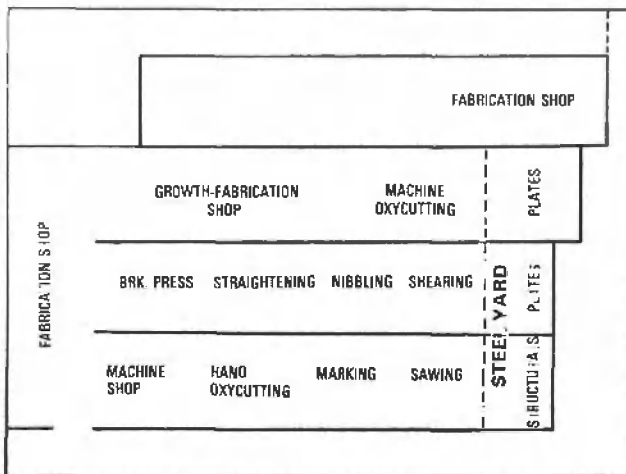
Schematic layout of Cutting & Fabrication Shops
